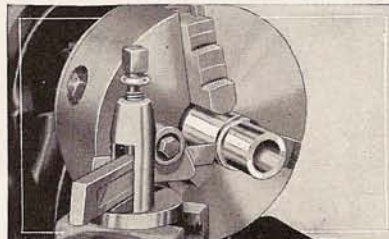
Cutting Off a Bushing Which Has Been Machined Complete in the Chuck.
